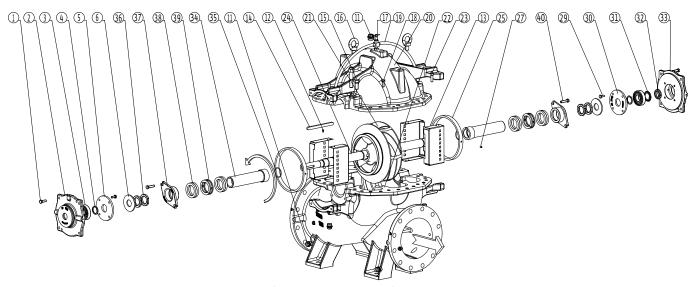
Exploded view of Atmos TERA-SCH hydraulic (version with gland pack)
